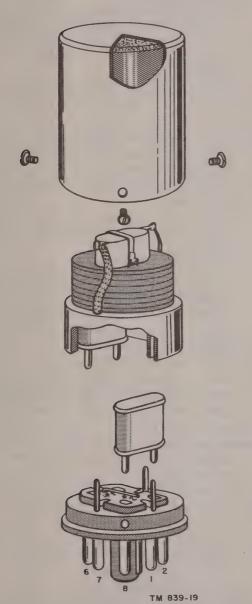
Radio transmitter T-278/U crystal oven, exploded view.
